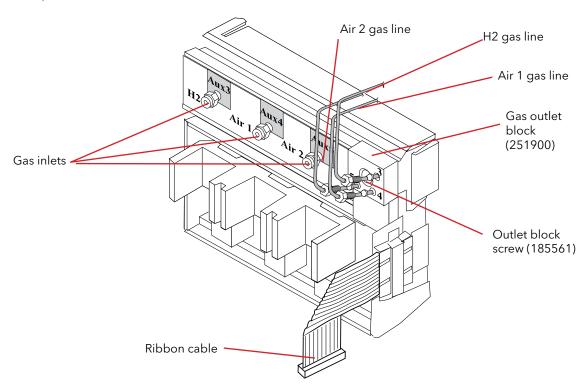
Auxiliary EPC Manifold and Aux EPC Mixing Assembly
